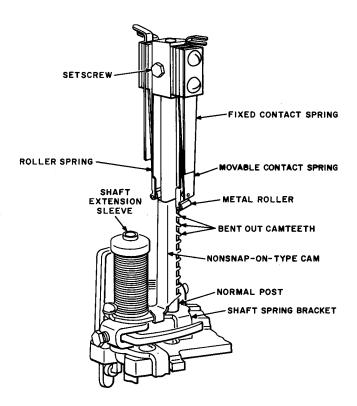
Normal Post Spring Assembly Having Metal Rollers Operated by Nonsnap-On-Type Cam
